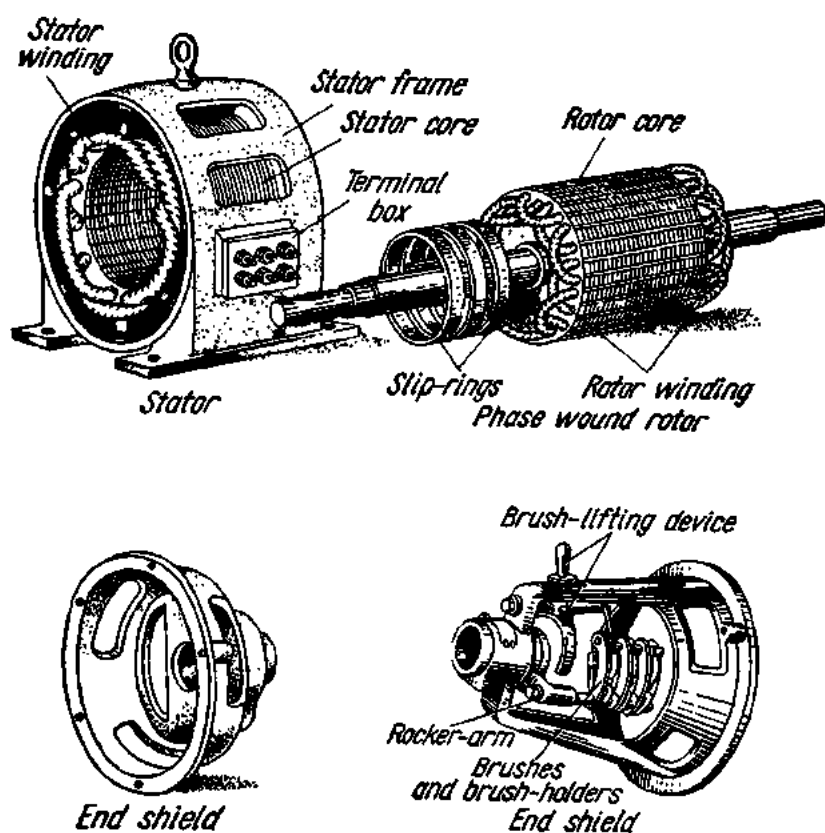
Slip-ring (wound-rotor) motor taken apart
